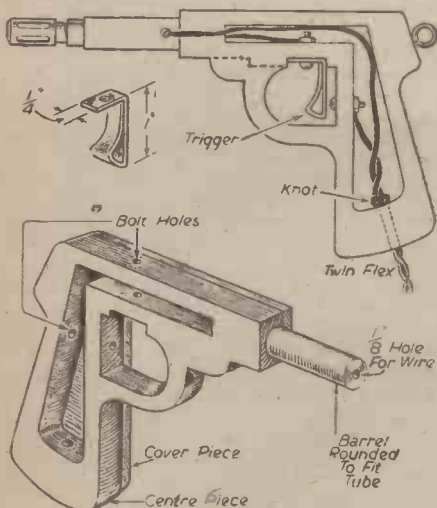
Side view, with cover piece removed to show interior and wiring, with general view of gun parts.
